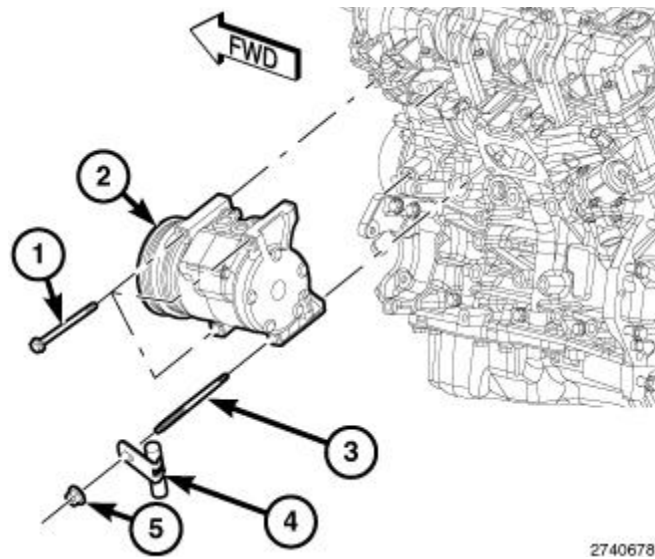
A/C Compressor, Nut, Stud & Three Bolts
